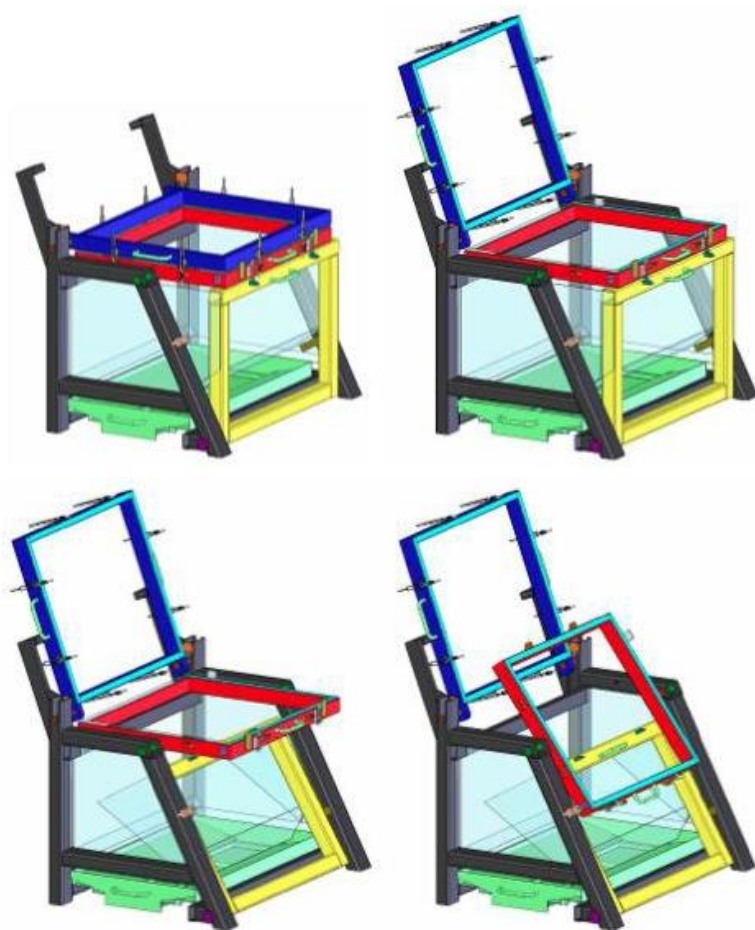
CAD design of support table showing in different steps how to replace a glass panel by rotating different parts (upper clamping ring (blue), base support (yellow) & lower clamping ring (red)).
